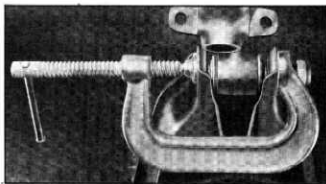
Indexing Threads of Pivot and Lower Control Arm
